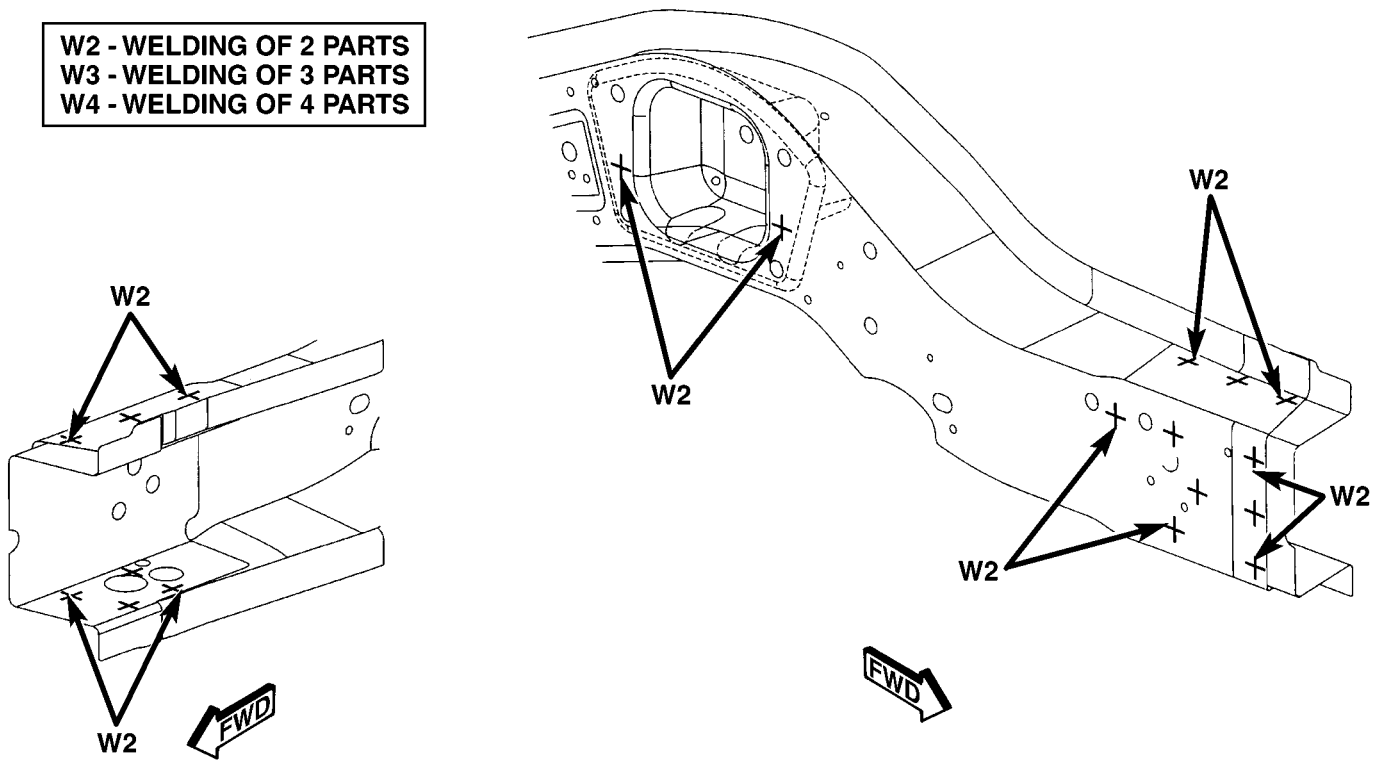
ENGINE MOUNT TAPPING PLATE & BUMPER EXTENSION TO FRONT SIDE RAIL
